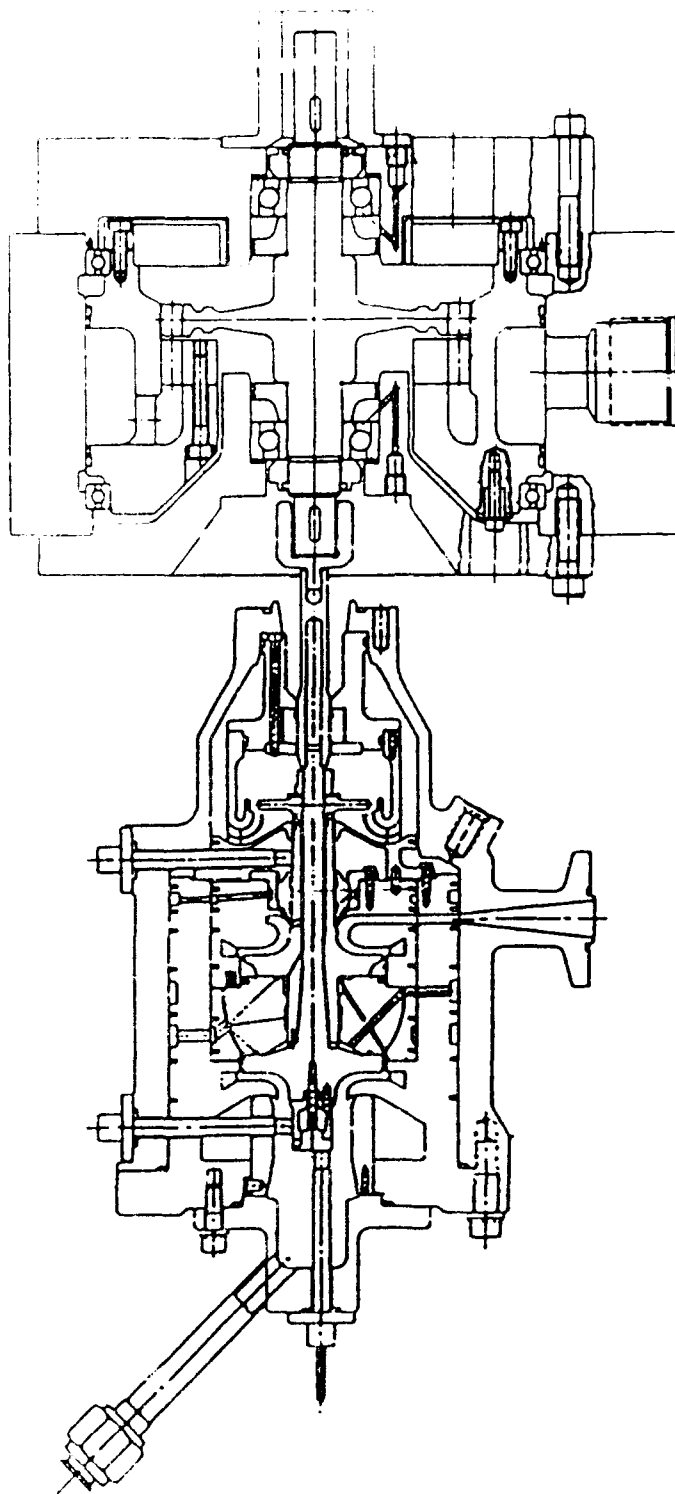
Drive Turbine and Torquemeter Assembly
